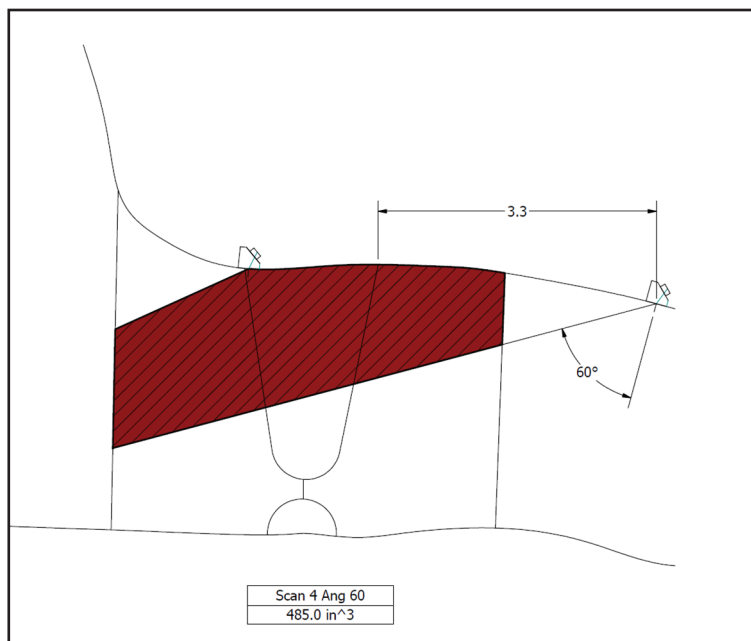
Weld RCW-21, 60° Head Side Axial Scans
